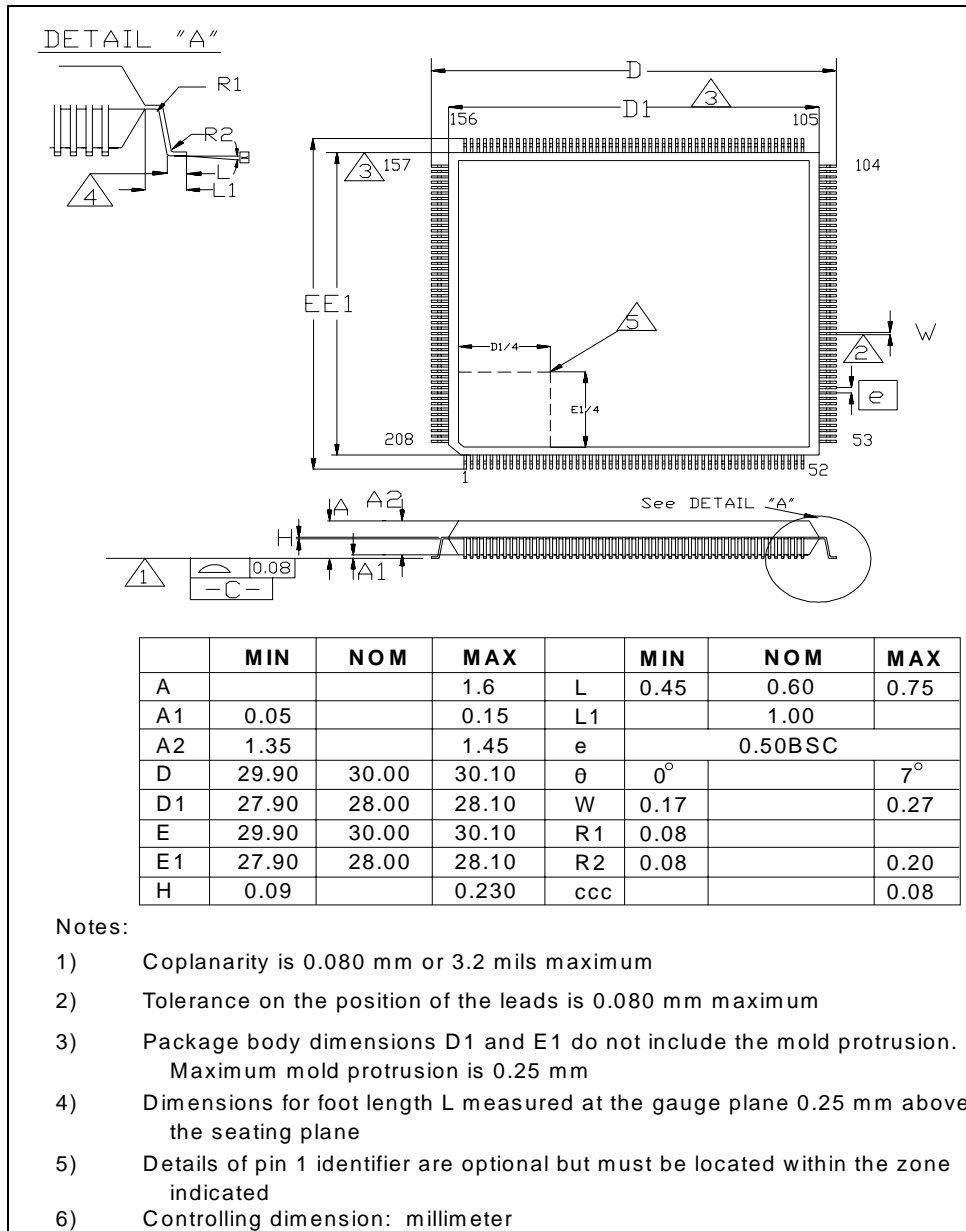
208 PIN TQFP PACKAGE OUTLINE
